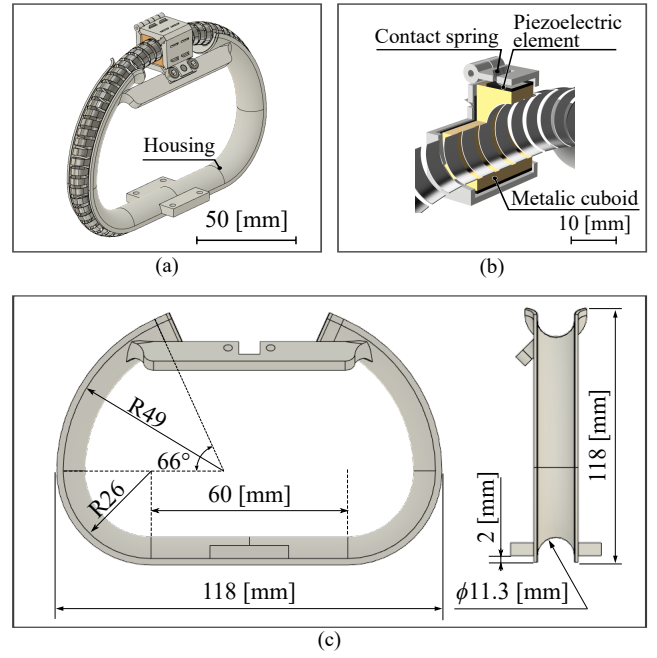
(a) Housing and electrodes for the torus wheel. (b) Springs provide electrical contacts to the stator. (c) The housing holds the coil spring.
